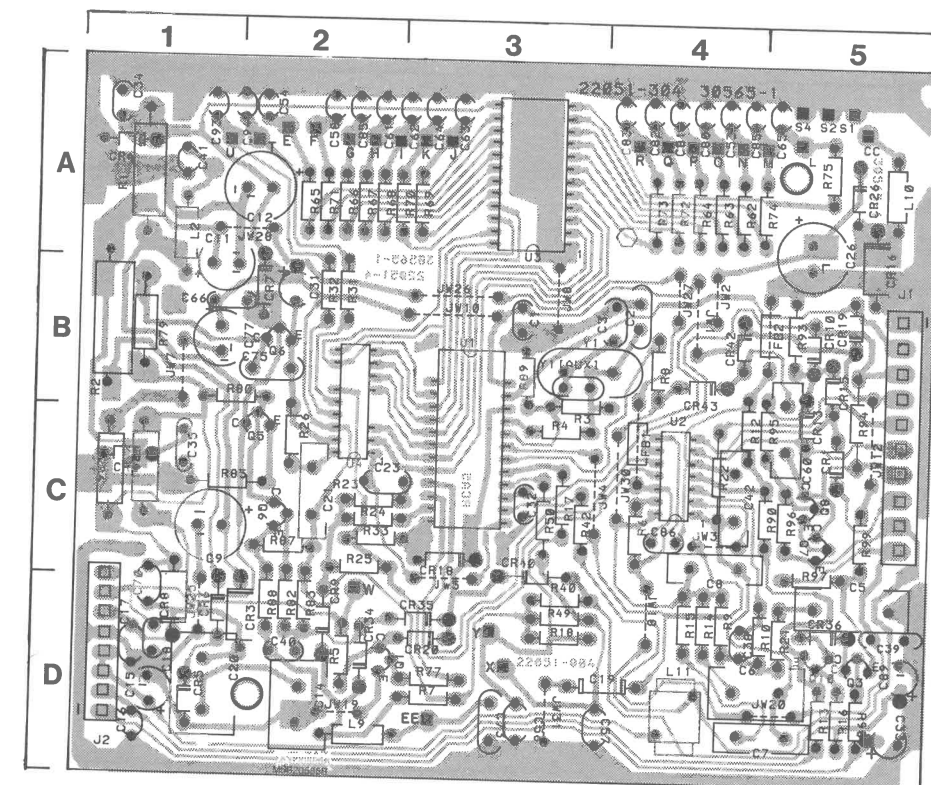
MSC 012RA Tuner Control Module Circuit Board
